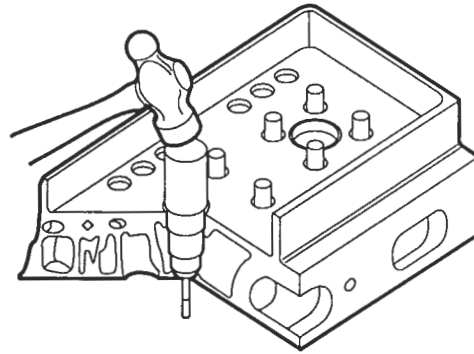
Install Injector Tubes with Tools J 5286-4C and J 5286-5
